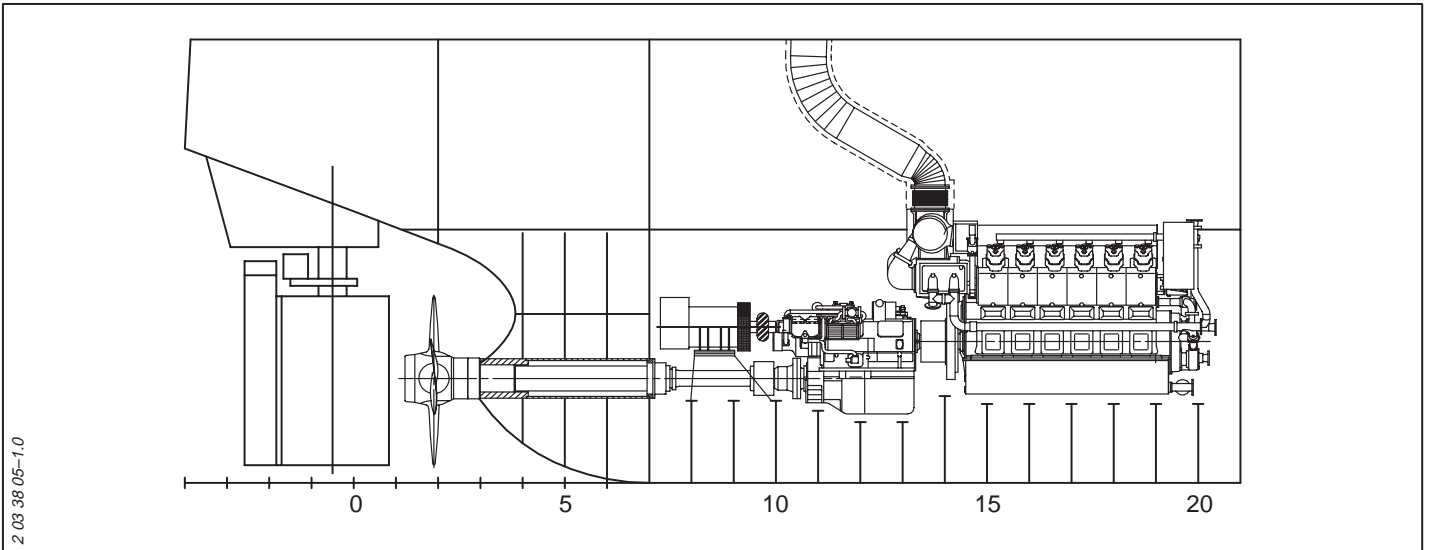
Propeller equipment type VB (12V23/30A, AMG 16, VB 640)
